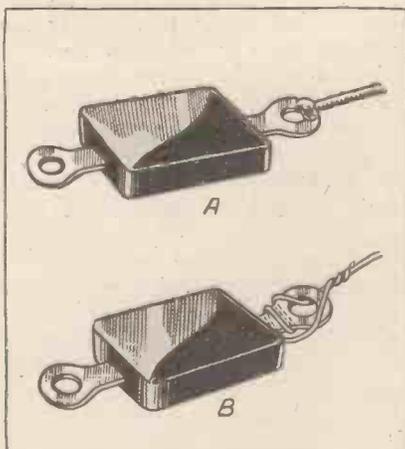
Two ways of joining a wire to small condensers. (A) is for the man who solders, while the lower (B) will make quite a good joint without soldering.
